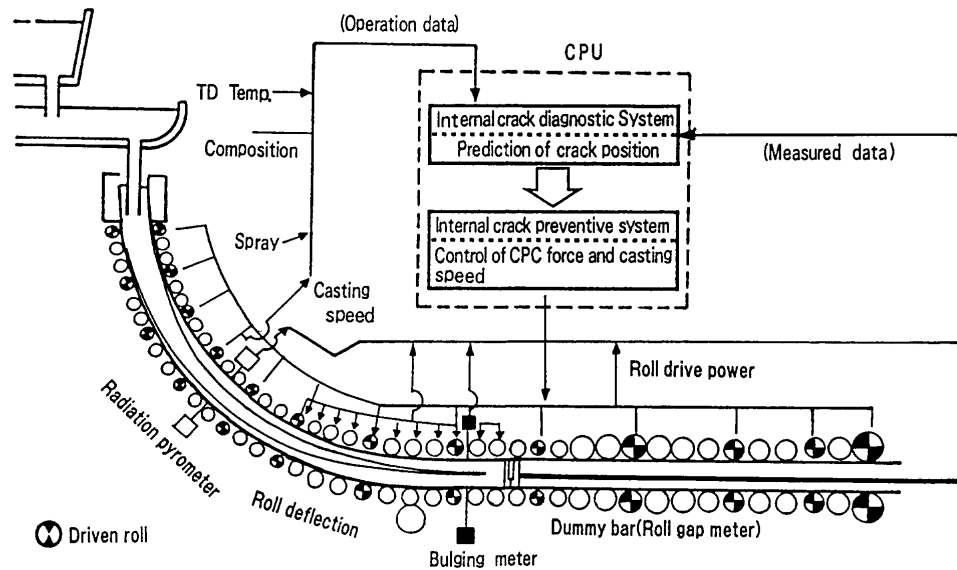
On-line system to diagnose and prevent internal cracks in continuous casting.
